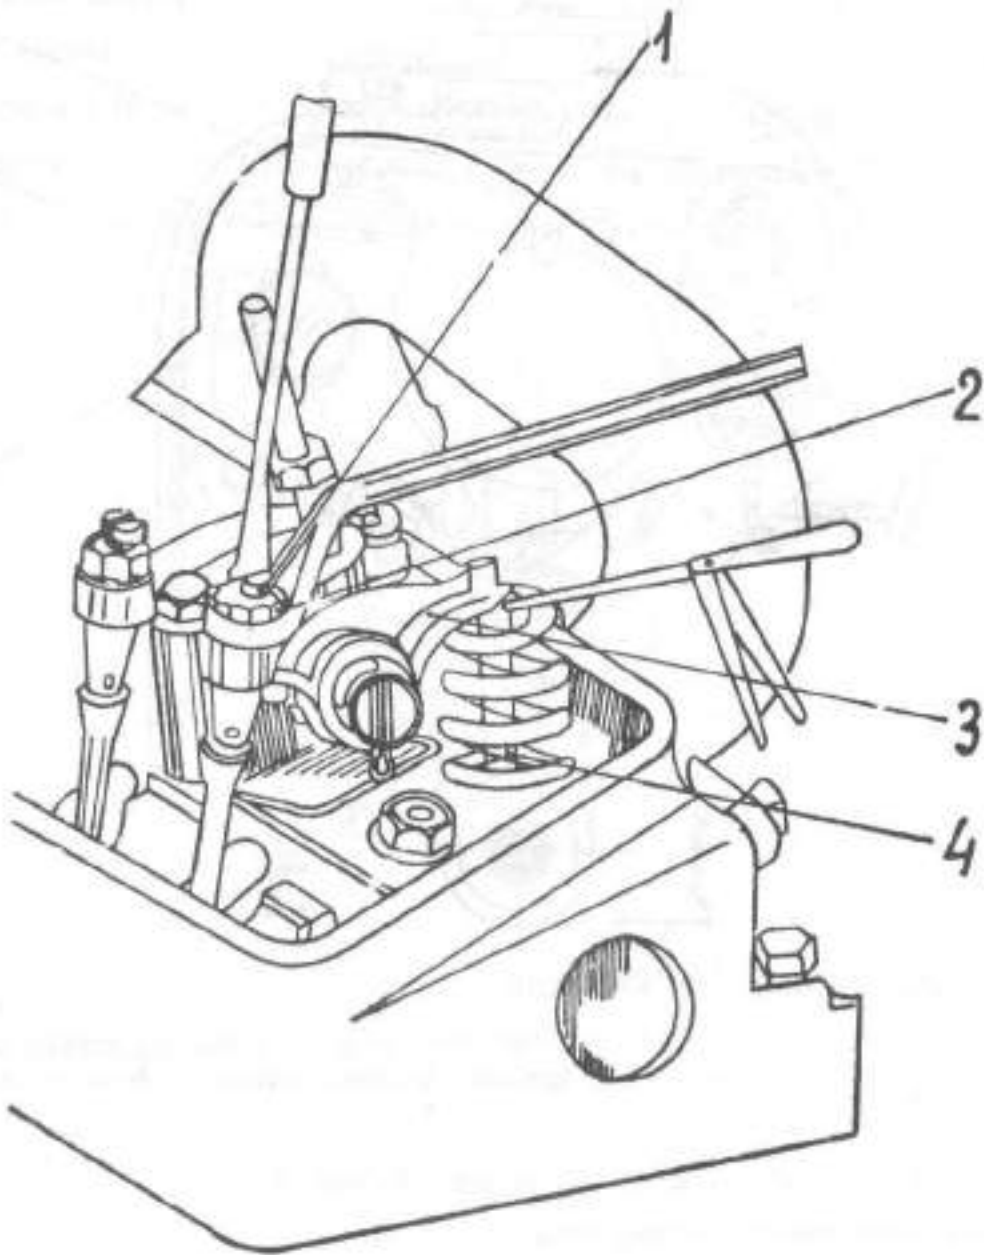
ADJUSTING CLEARANCE BETWEEN VALVES AND ROCKER ARMS.
